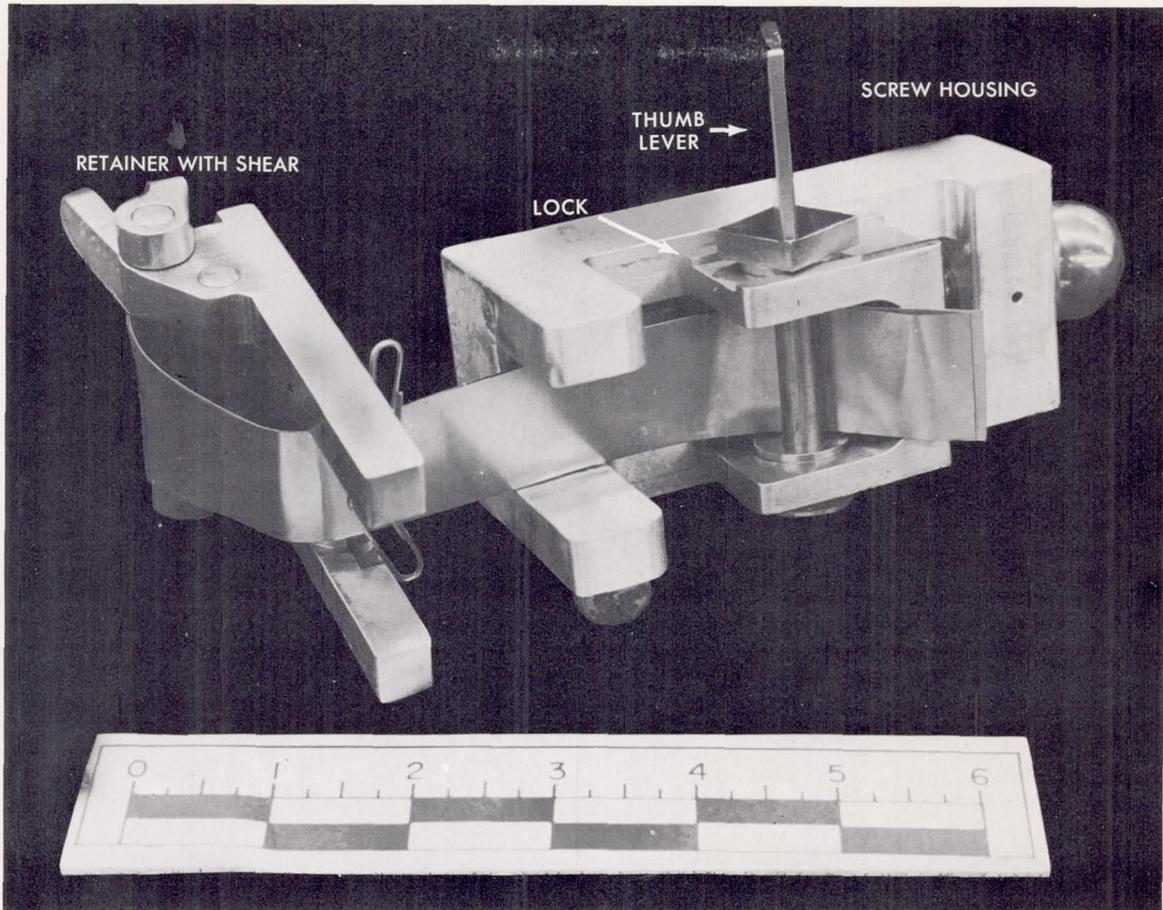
Assembly of fitup tool, showing housing and retainer.
